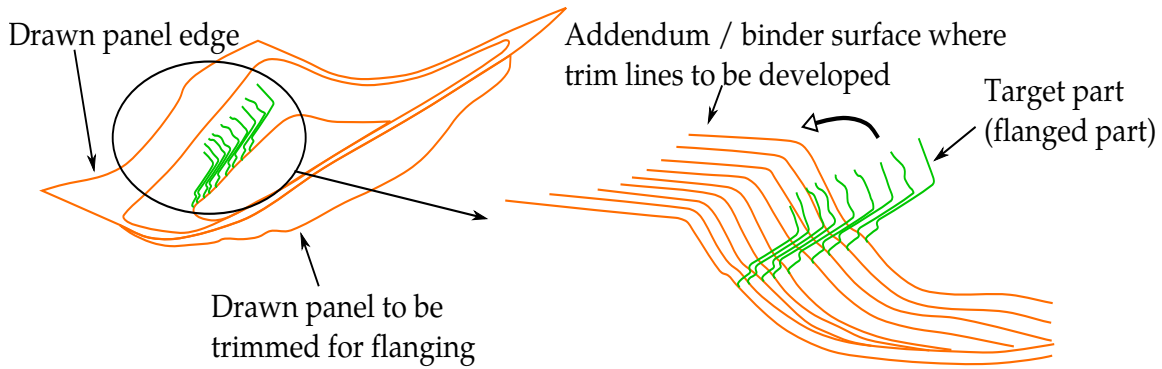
Multiple section view showing the target part and addendum surfaces.
